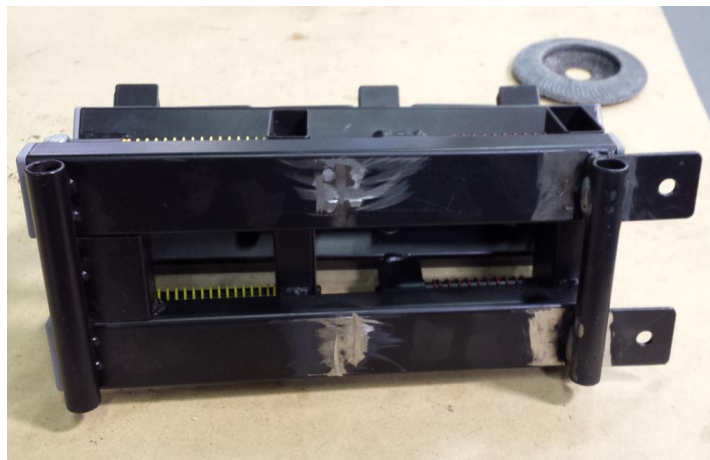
Mounting Ring Removed and Welded to back of Dampening Assembly
